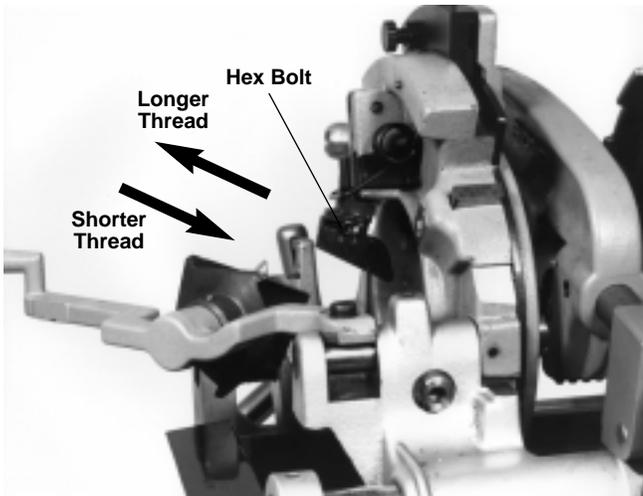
Position Die Head Trigger Foot for Long or Short Thread
